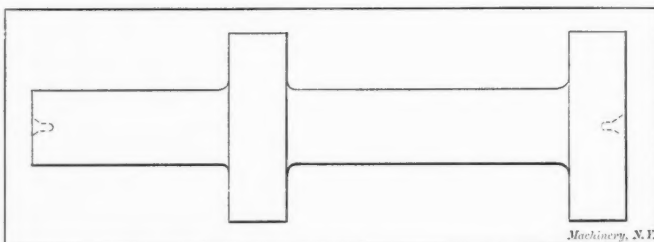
Test Piece used to set Grinder Table Straight, prior to Internal Grinding
